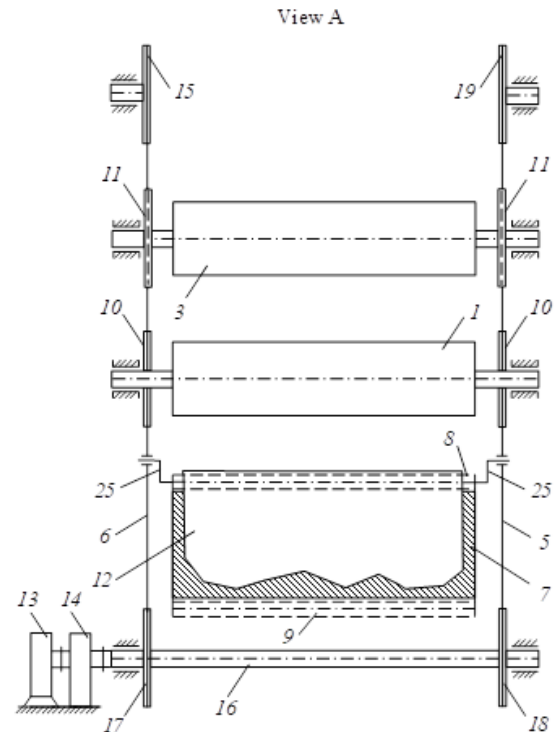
View A of the chain conveyor and base plate with the processed material (front view) 1, 2 - lower working rollers, 3, 4 - upper working rollers, 5, 6 - conveyor chains, 7 - base plate with rollers 8, 9; 12 - sheet material, 10, 11, 15, 17, 18, 19 - sprockets, 13 - electric motor, 14 - gearbox, 16 - roller
